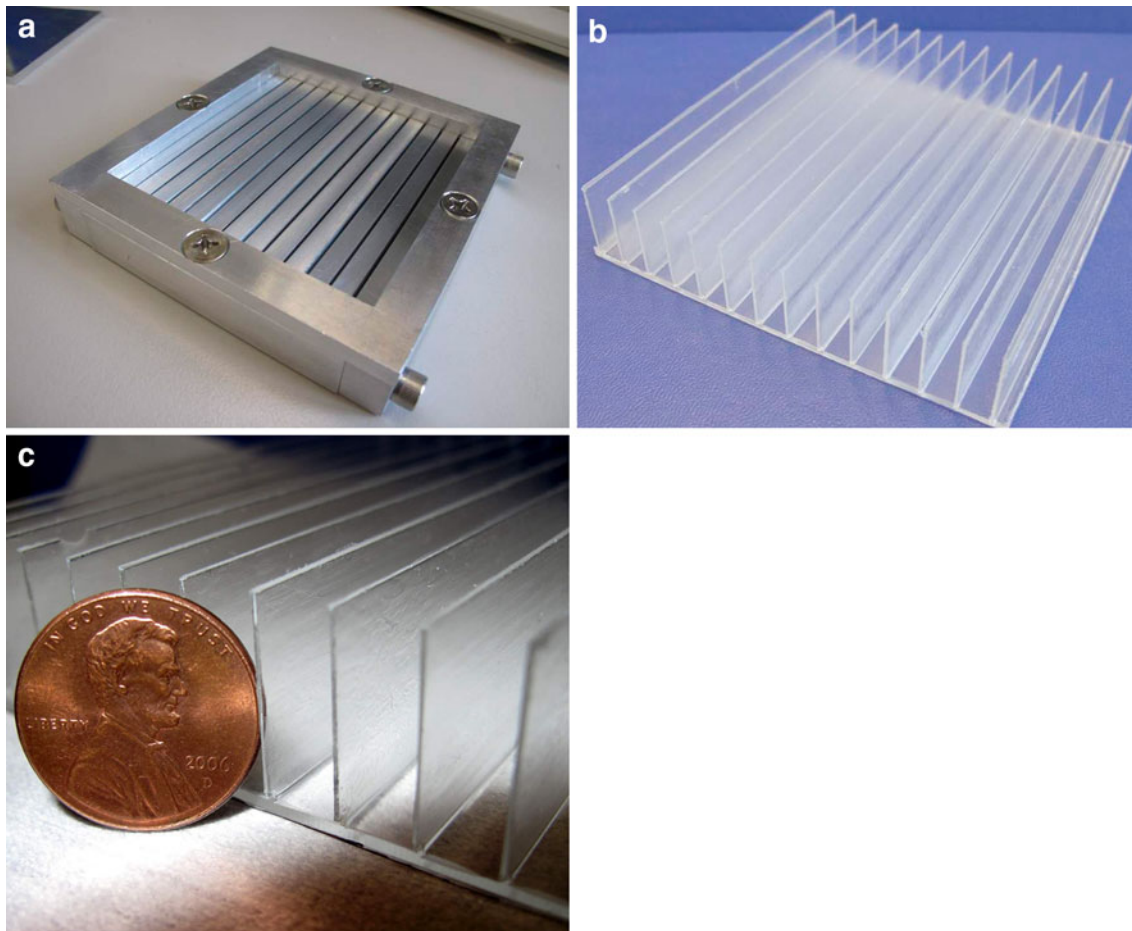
Polymer agitators by hot embossing with an assembly mold insert. a Aluminum assembly mold insert. b Hot embossed agitators on a 10 cm × 10 cm area with a high aspect ratio of 35. The
